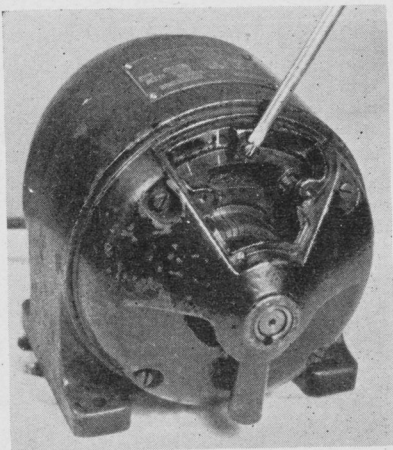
The rotation of repulsion start-induction run motors may be changed by unloosening screw in brush holder yoke and shifting position of brush holder. Care must be exercised to align brush holders with marks on yoke and on motor frame.
